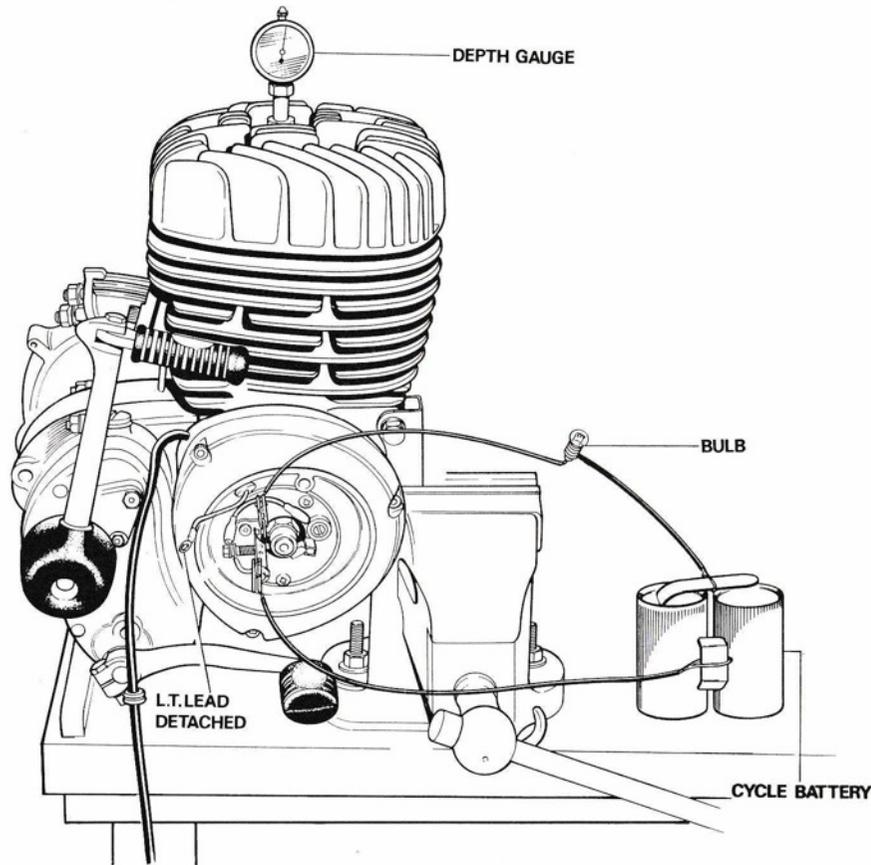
Checking piston position using a dial gauge, also checking ignition timing with battery and timing light.
